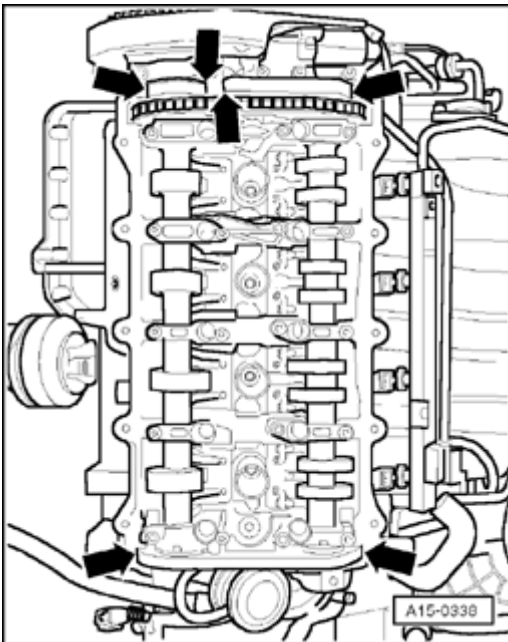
Locating Transitions On Sealing Surface Of Cylinder Head
